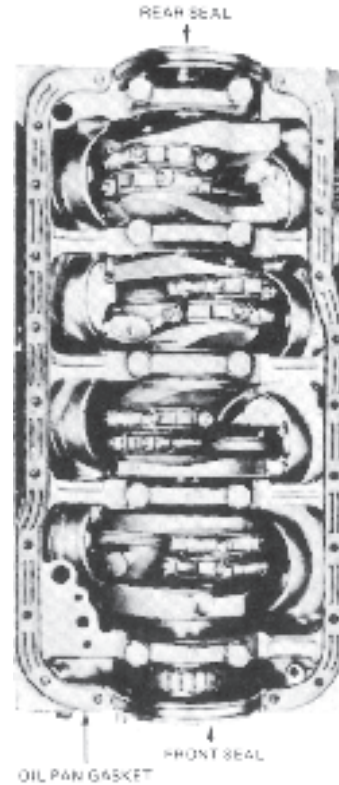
Oil Pan Gaskets and Seals installed-302 and 351-W Engines
